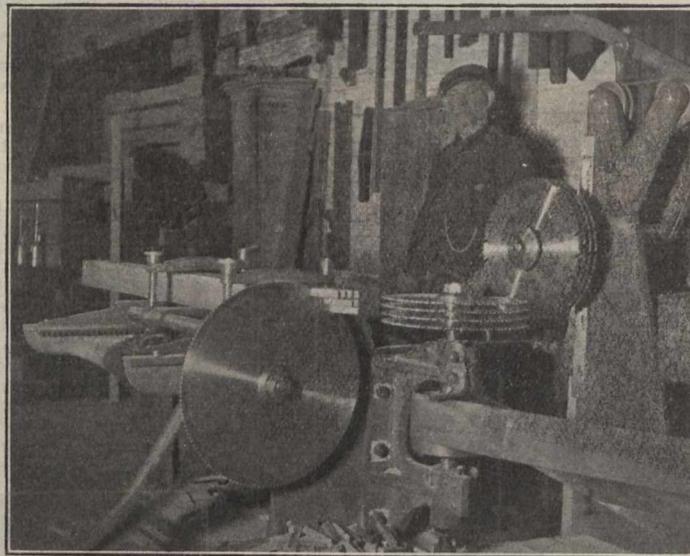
Tie Plug Forming Machine Cutting off Finished Plugs.
